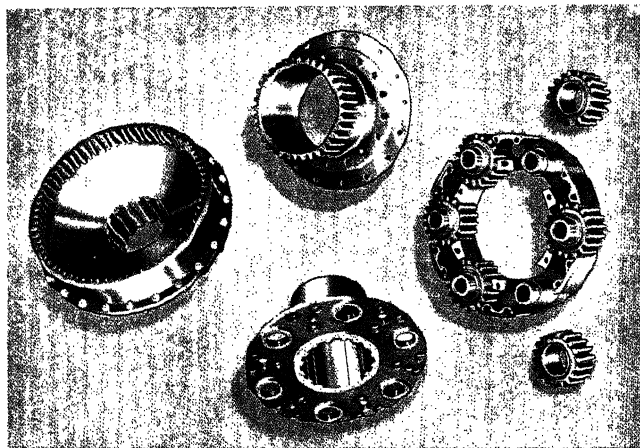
Details of the airscrew reduction gear for Twin "Wasp" engine.
